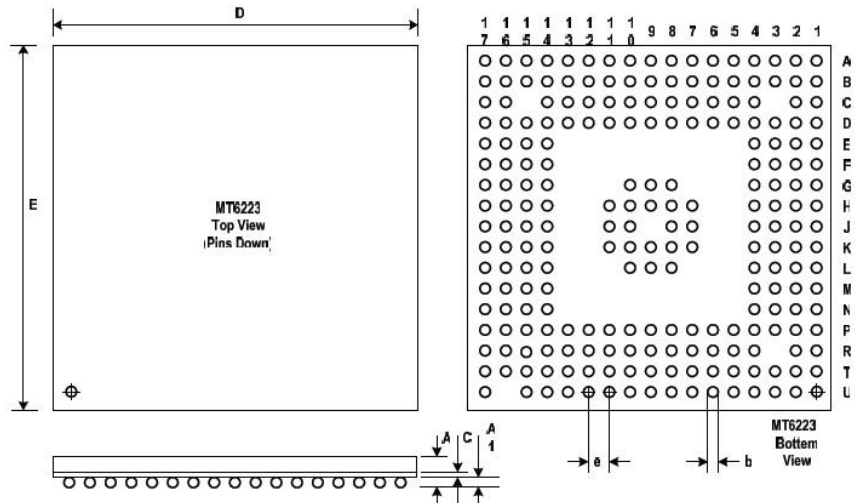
Outlines and Dimension of TFBGA 9mm\*9mm, 224-ball, 0.5 mm pitch Package
